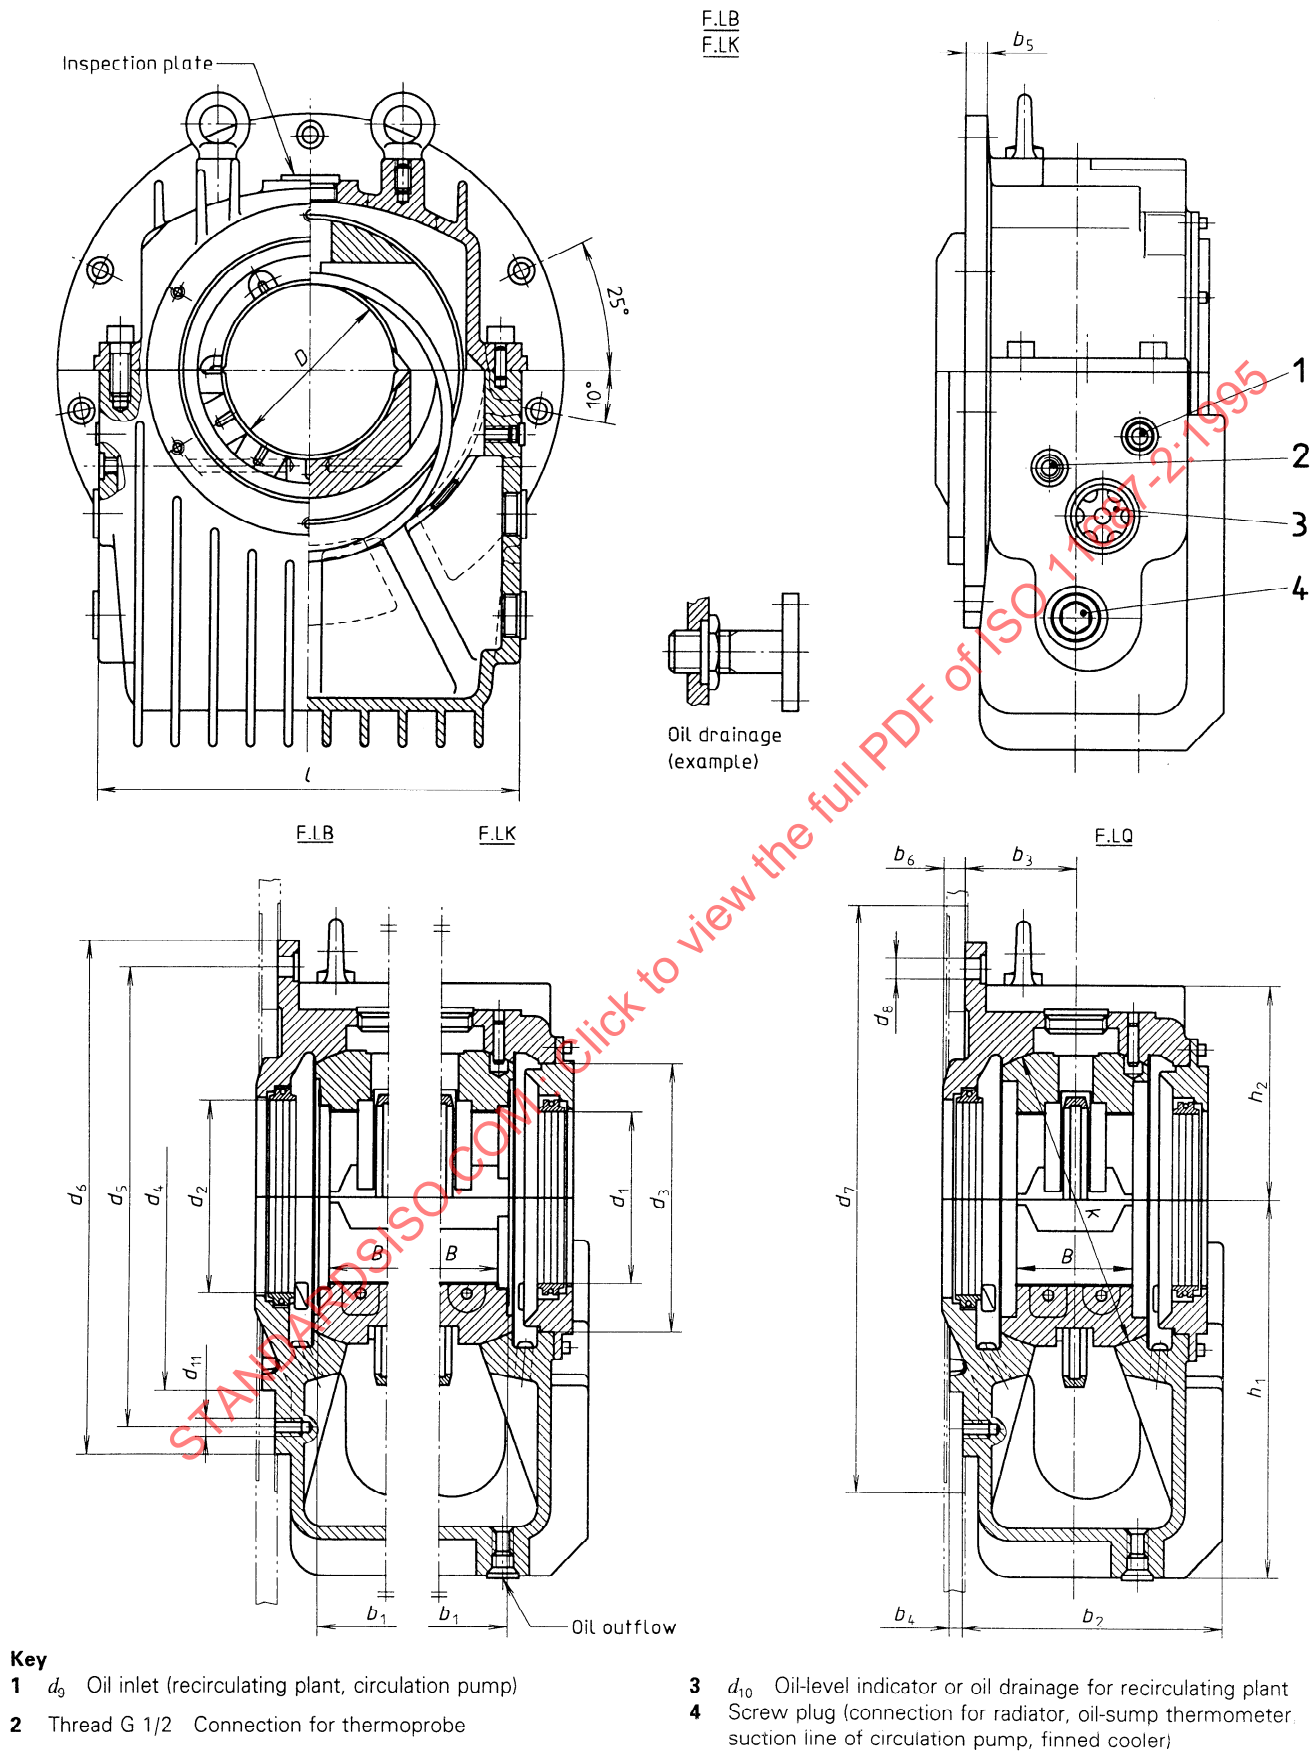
Examples of side flange bearings — Size range 9 to 28
